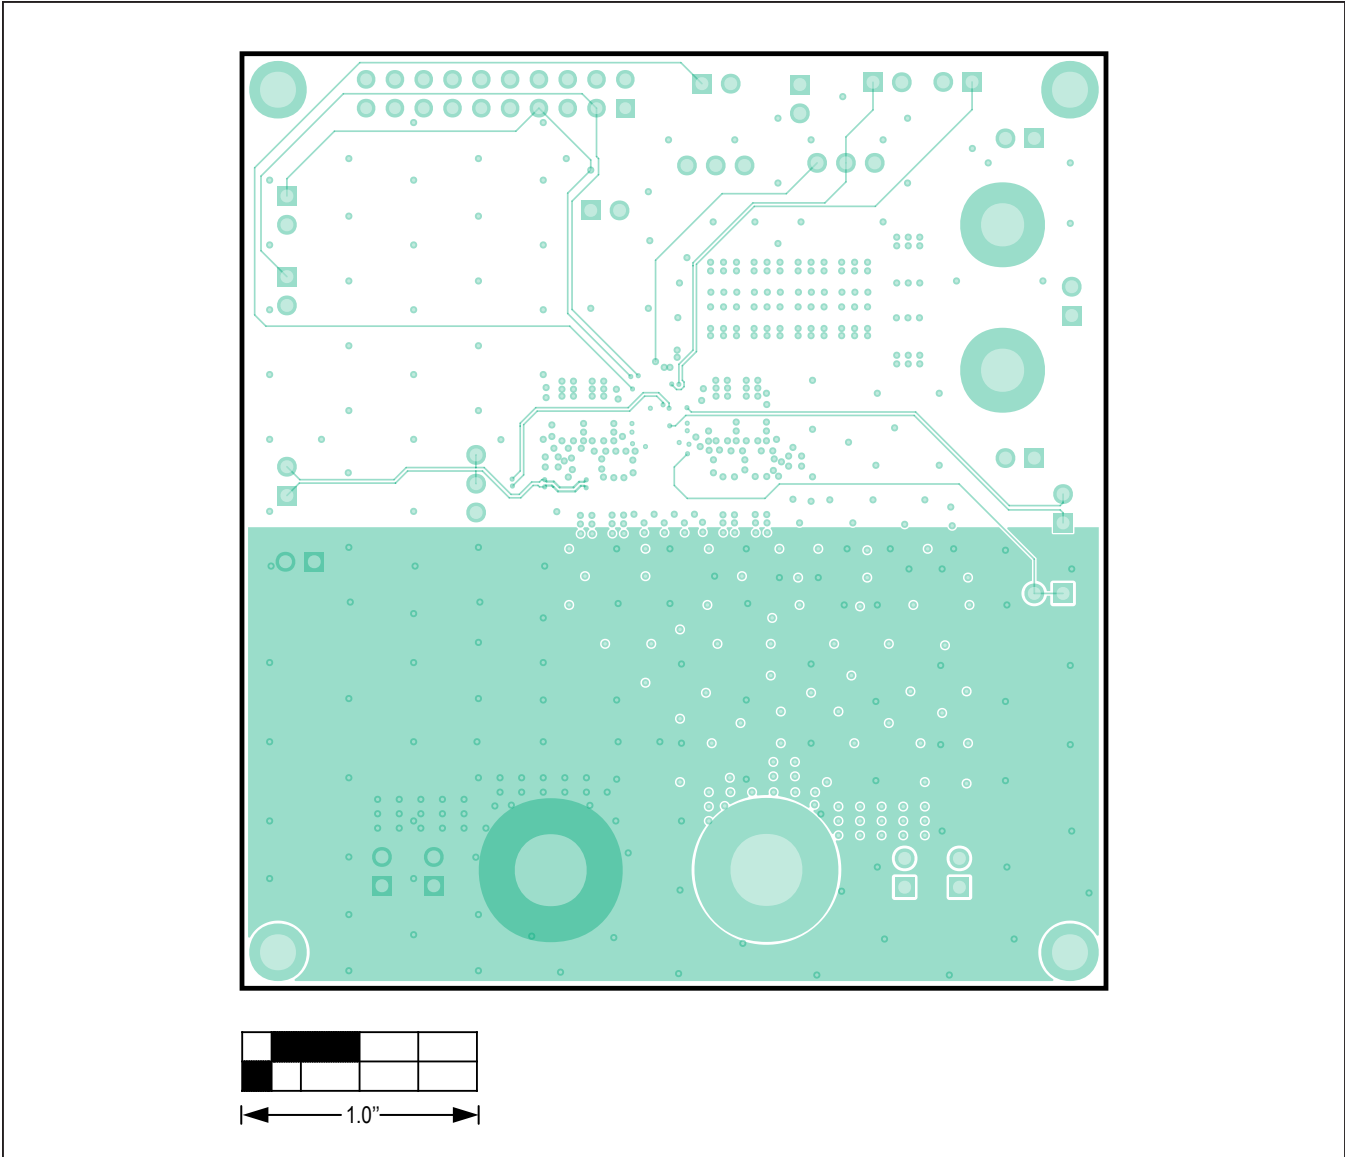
MAX20499A EV Kit Component Placement Guide—Inner Layer 4
